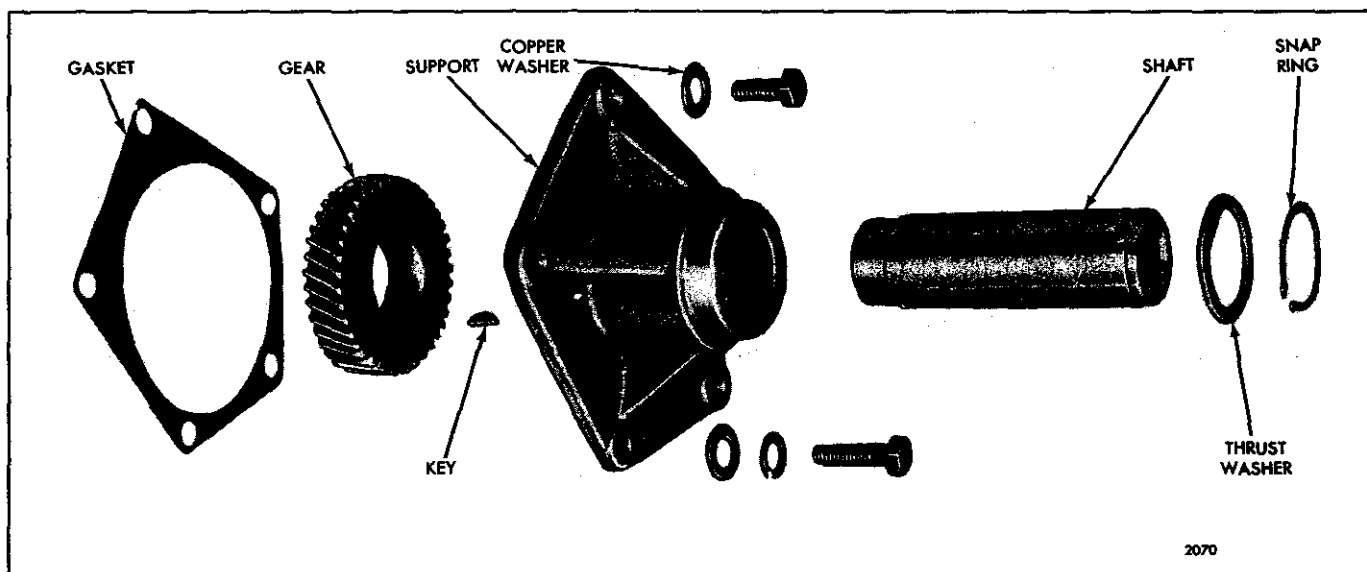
Blower Drive Gear and Support Assembly Details and Relative Location of Parts (In-line Engine)
